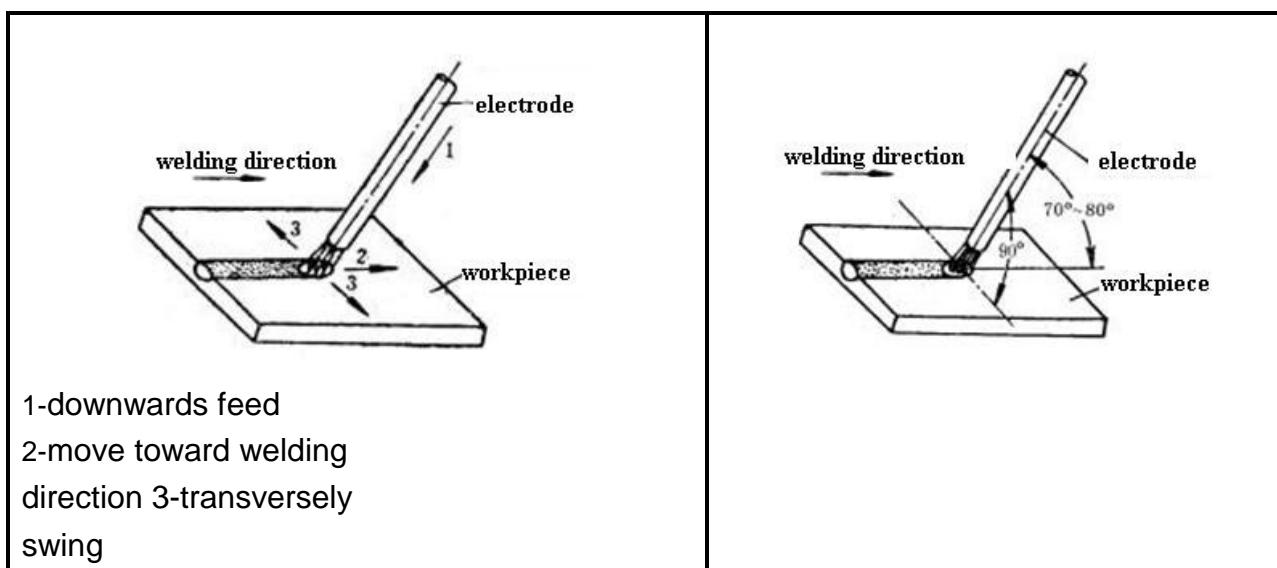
Three basic movement directions of electrode in flat welding
